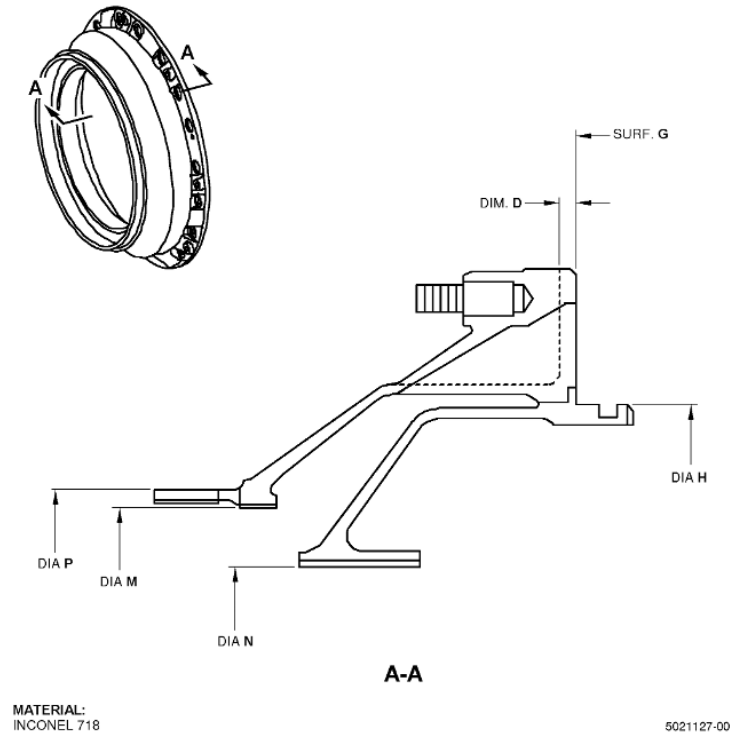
No. 4R Bearing Air/Oil Seal Dimensional Inspection Areas
